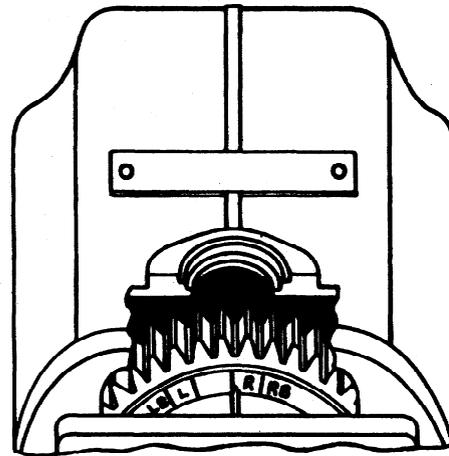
Alignment of Timing Marks on Distributor Gear – 6 Cylinder, Single Breaker, Right Hand Rotation
